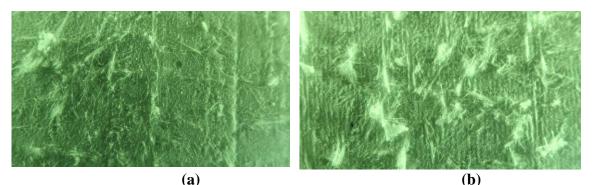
Composite material after cut using Ceramic Tool (scale 5:2). (a) Flank Wear = 0.12 mm after 0.2 min. (b) Flank Wear = 0.7 mm after 1.4 min.
